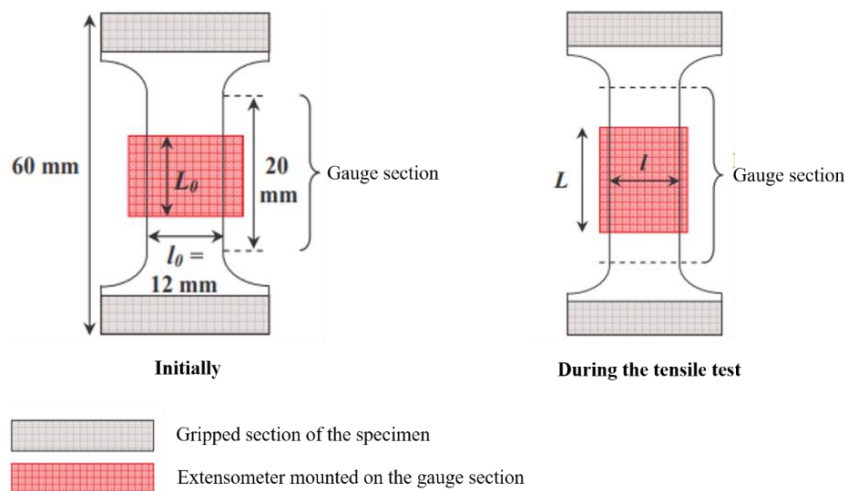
Geometry of the machined tensile test specimen with thickness e
